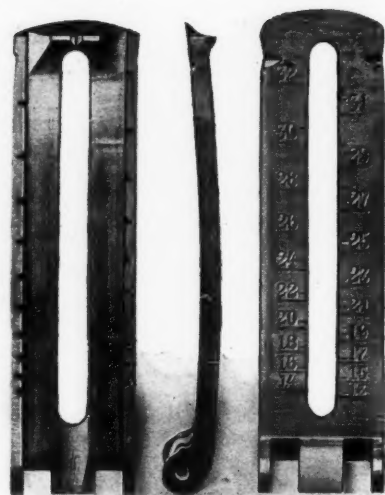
Sight Leaf showing Notches cut by Machine in View at Left
